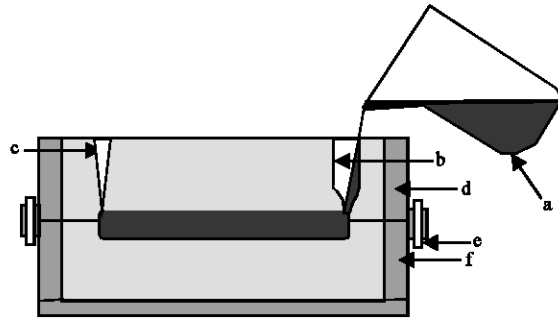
Schematic drawing of the sand casting. a: molten aluminium, b: sprue, c: riser, d: cope, e: pin, f: drag
